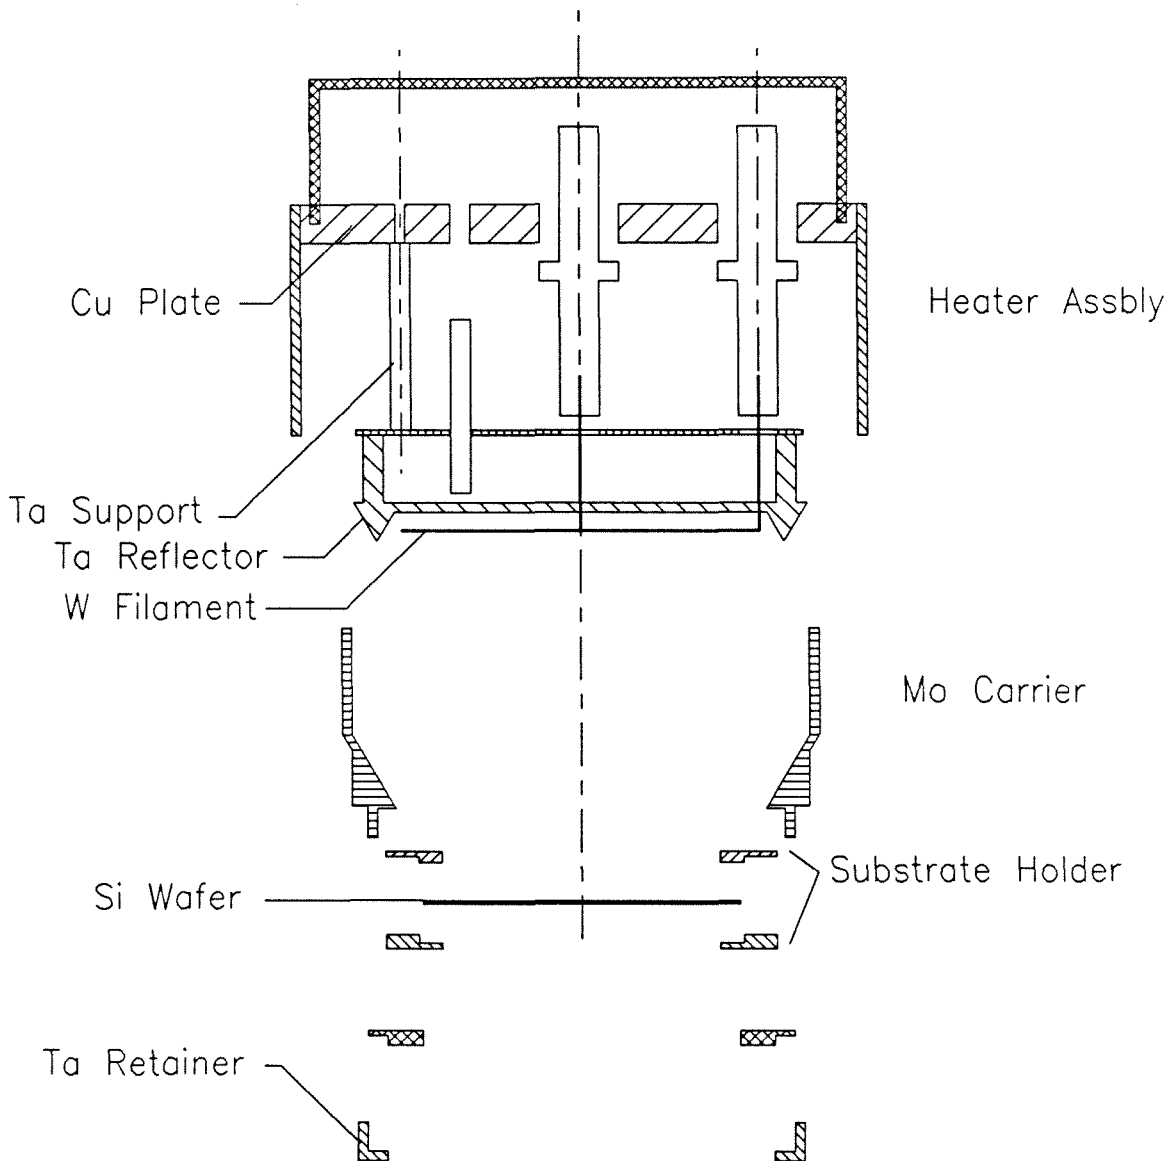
Si MBE substrate heater and sample carrier assemblies. A 2-in. diameter Si wafer is loosely held between two Ta rings. The ring-wafer assembly fits into the Mo carrier, which in turn mounts onto the substrate heater. The Si wafer is heated radiatively by a W filament, backed by a polished, Ta reflector assembly. The hot, refractory metal heater parts are stood-off from a cooled, Cu housing by means of three long, thin, Ta rods.
